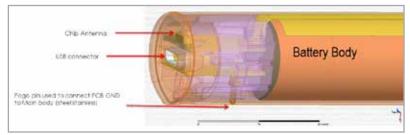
A 3D design of the final device including electronic PCBA and mechanical parts.
